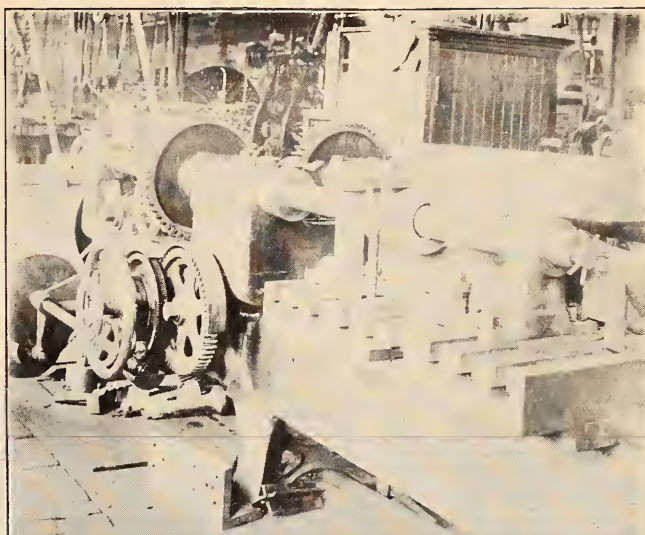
NILES CROSS HEAD BORING MACHINE, C., M. & ST. P. RY. SHOPS.
